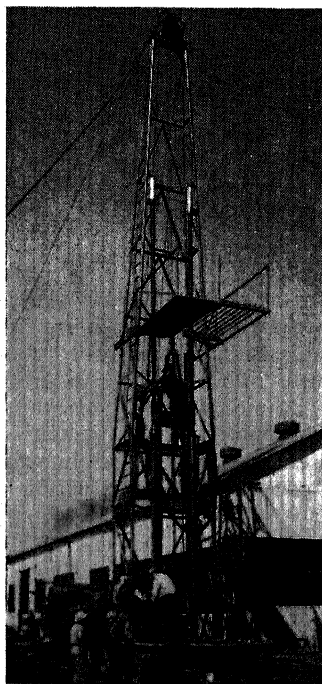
All welded portable drilling rig showing interesting design details. This rig is mounted on a special truck for use in mountainous country. It embodies hydraulic ram to force pressure on drill stem for faster drilling. When rig is disassembled it folds into one-third the operating length. See Fig. 570 for closeup of joints.
